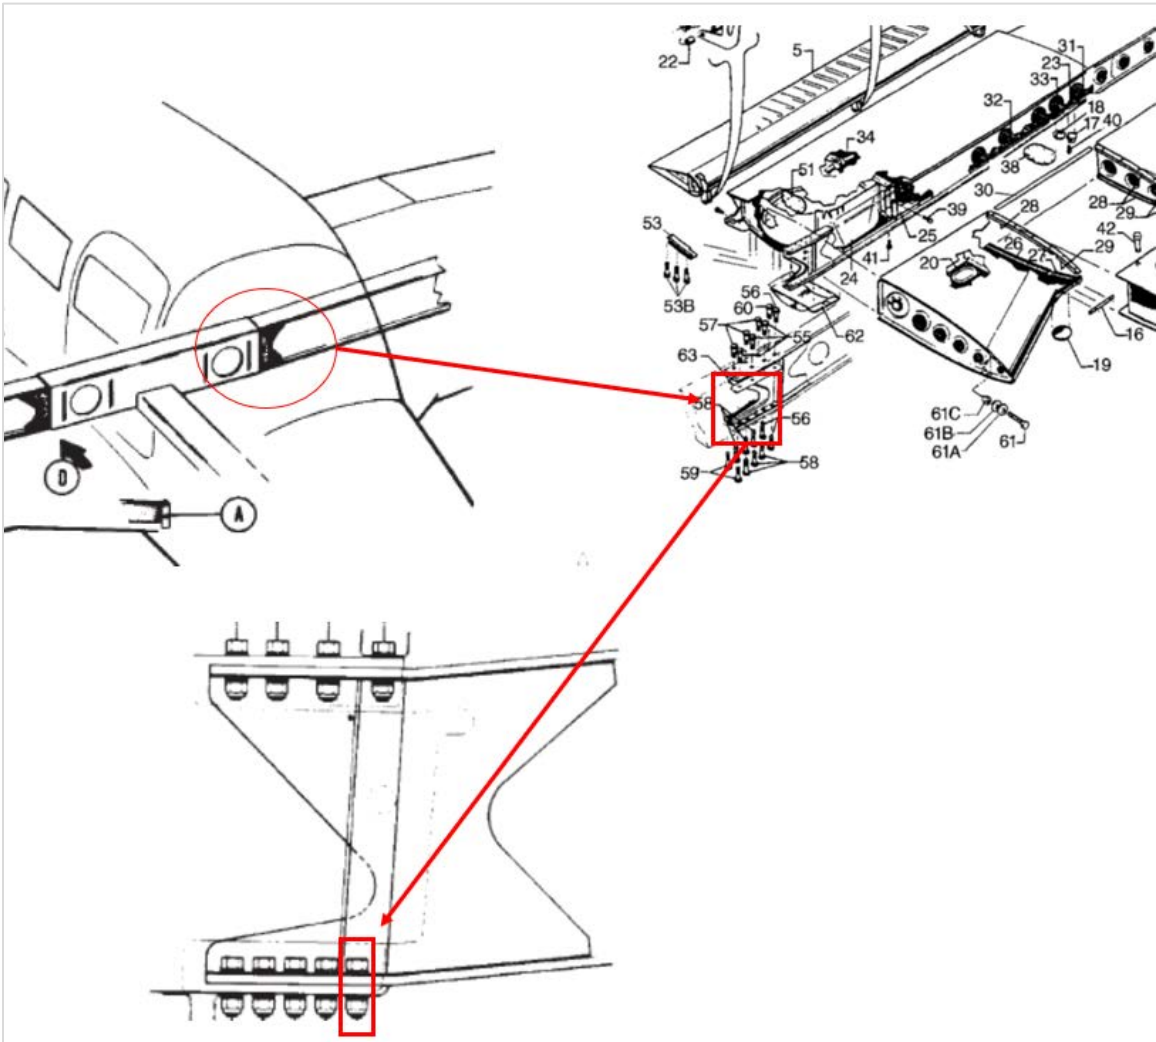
Exploded view of left wing spar assembly and attachment bolt
